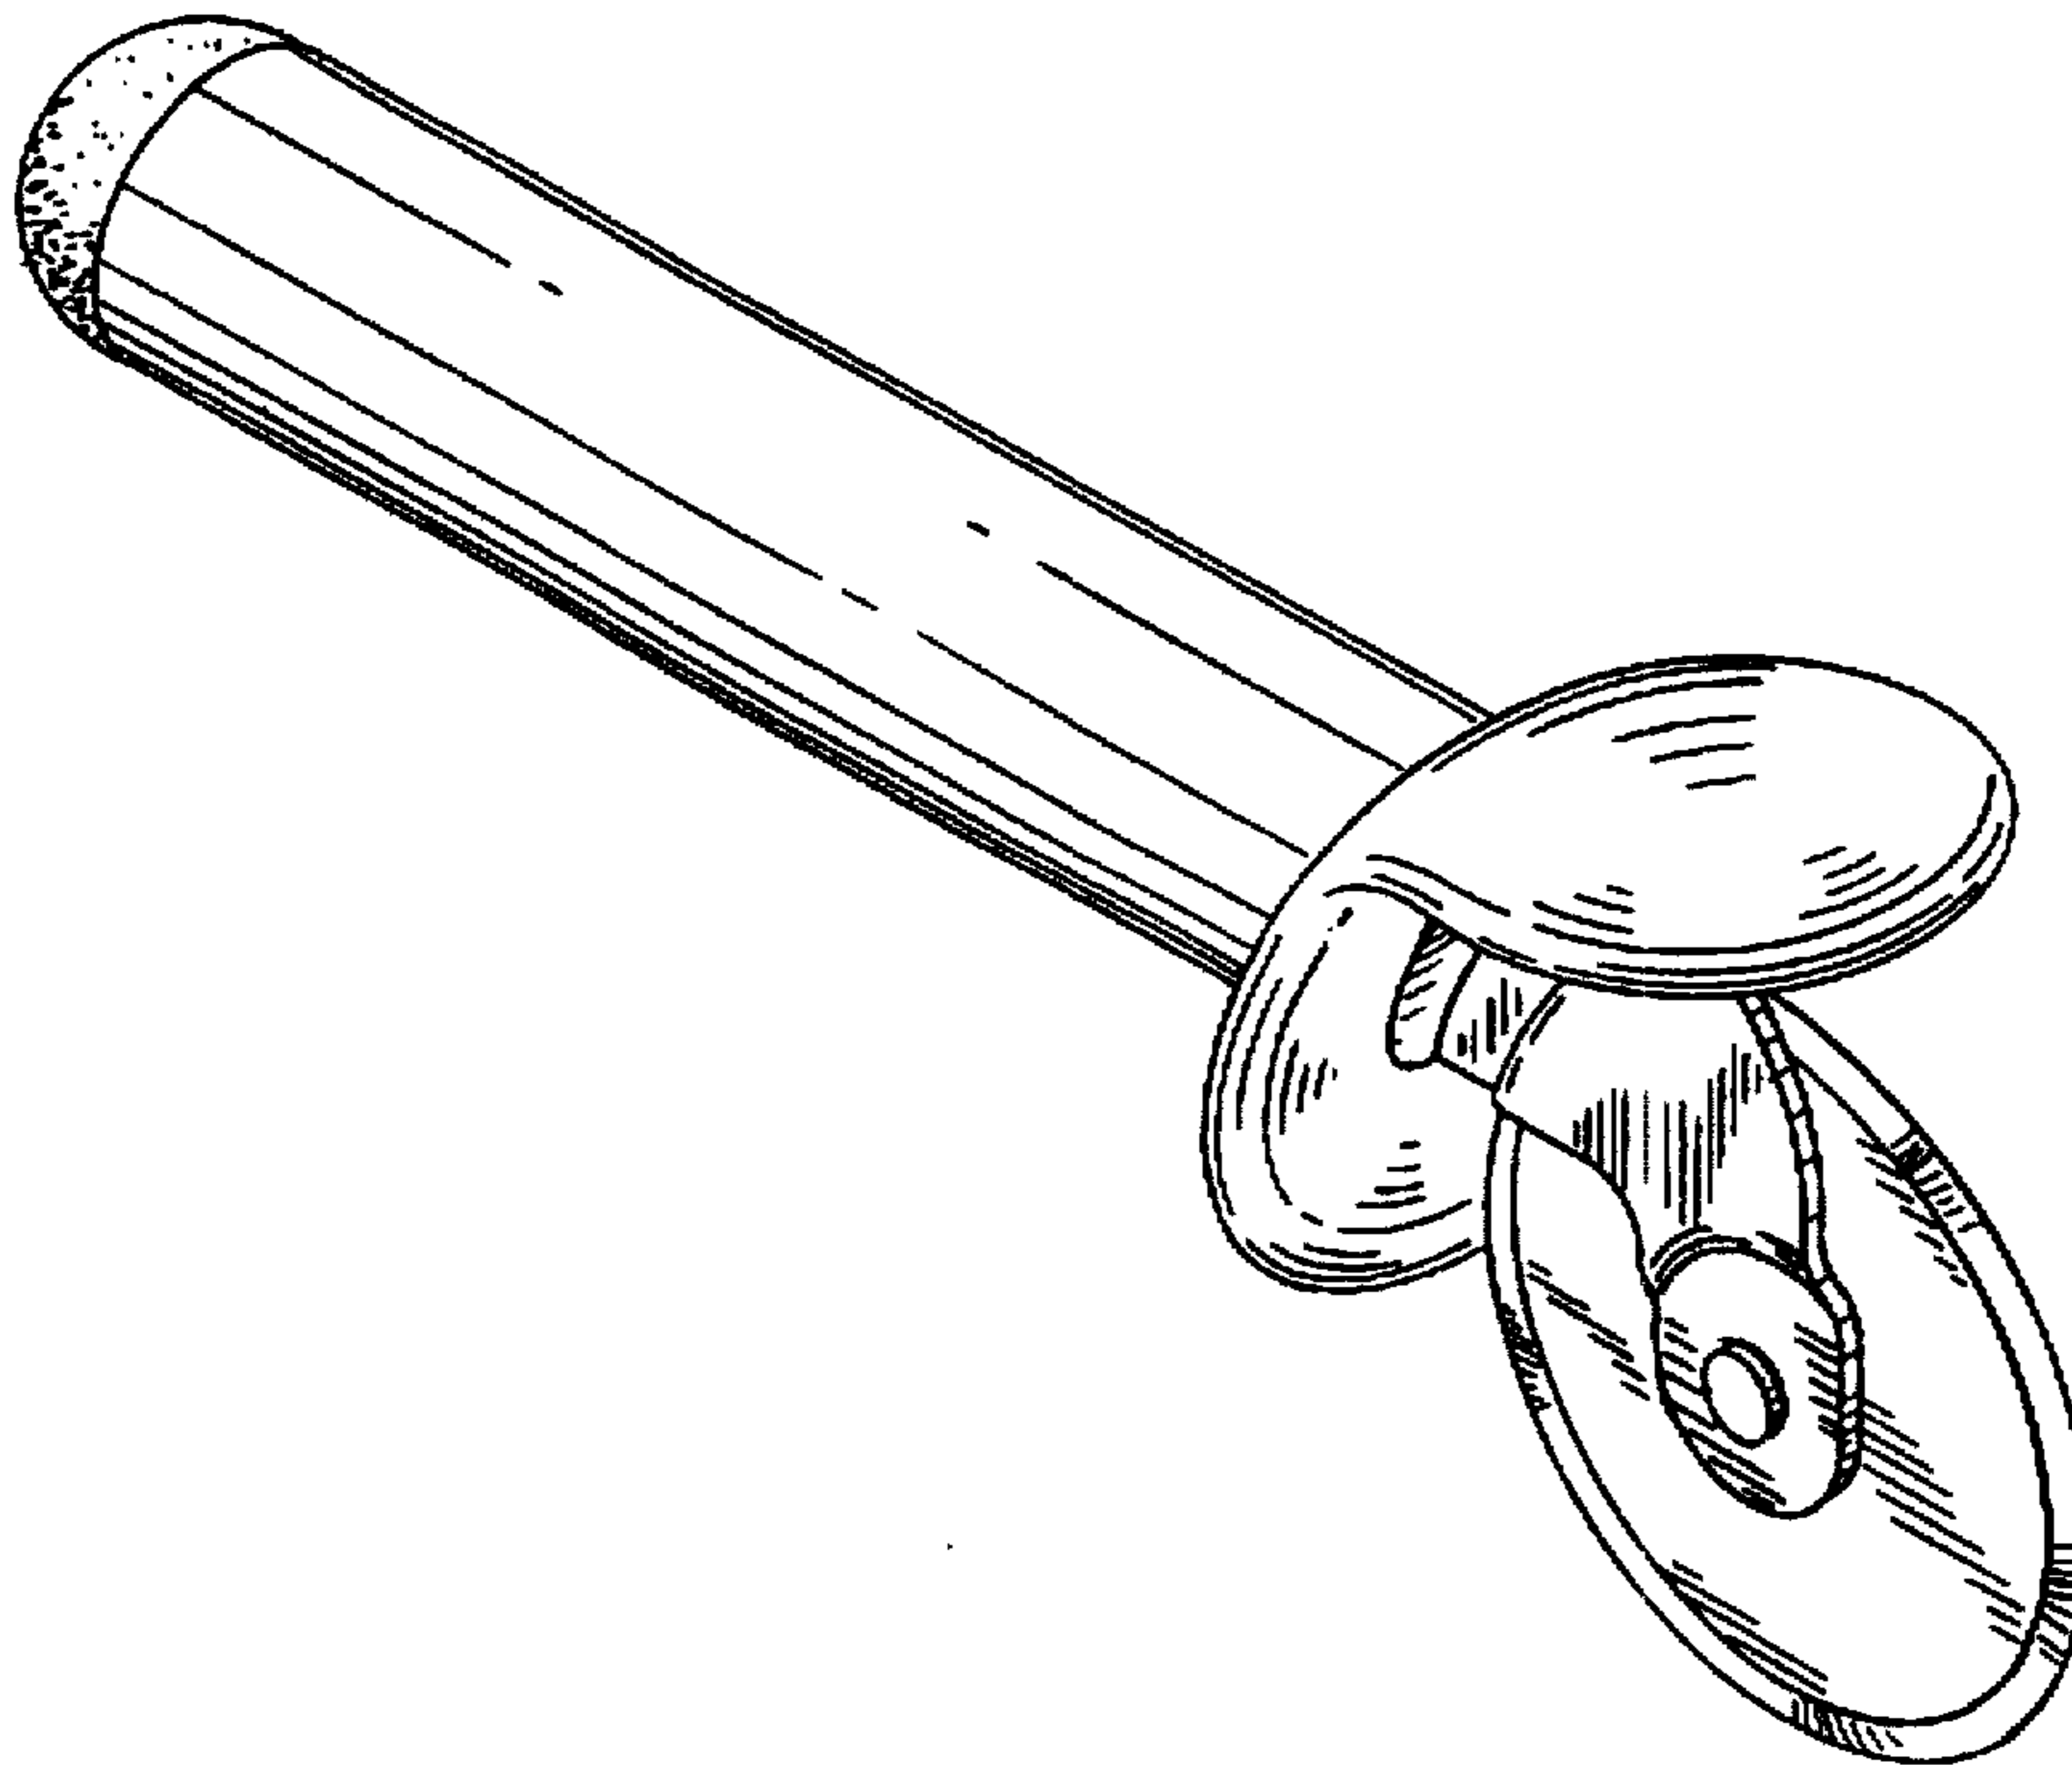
is a top, side and front, perspective view of a pizza cutter showing my new design;
